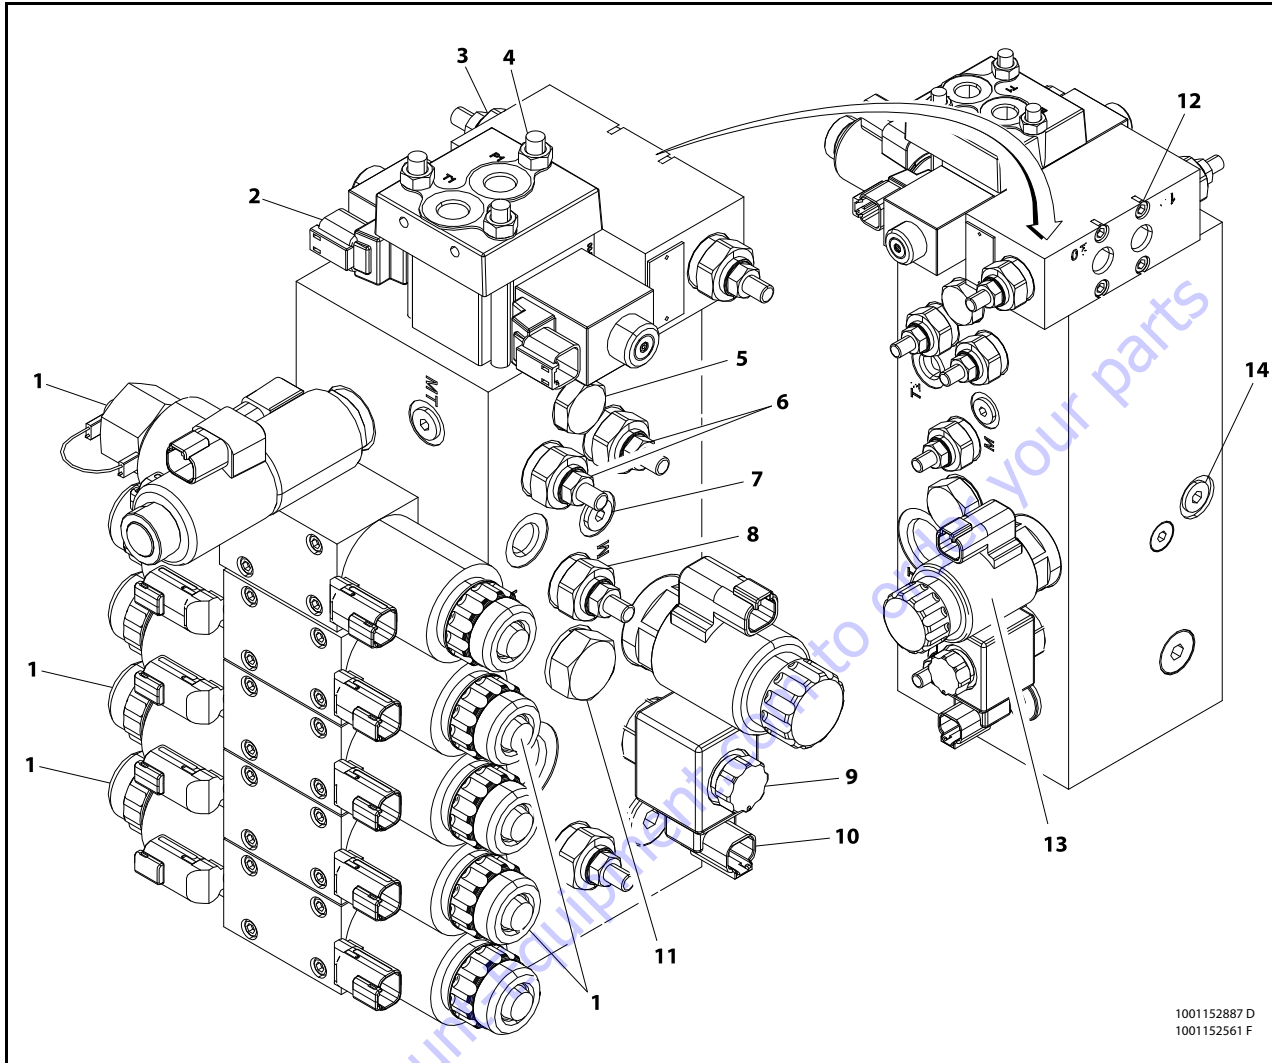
Main Valve Torque (SN 0300087000 through 0300177361, SN B300000100 through B300001392)
